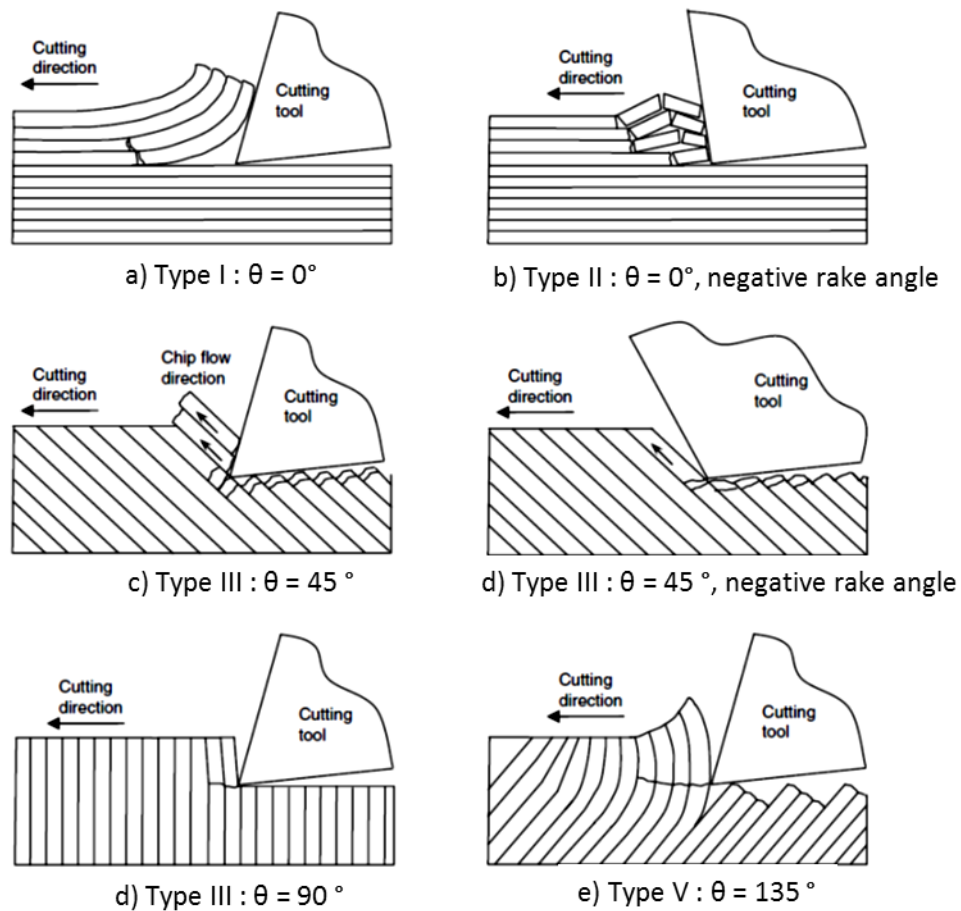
Cutting mechanisms in the orthogonal machining of CFRP with a sharp edge [55, 57, 58].
